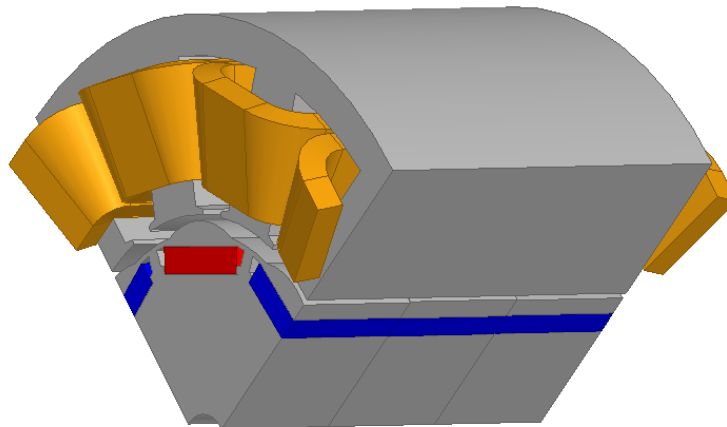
3D FE module model of 12-stator/8-pole IPM motor with 3-step-skewing rotor.
